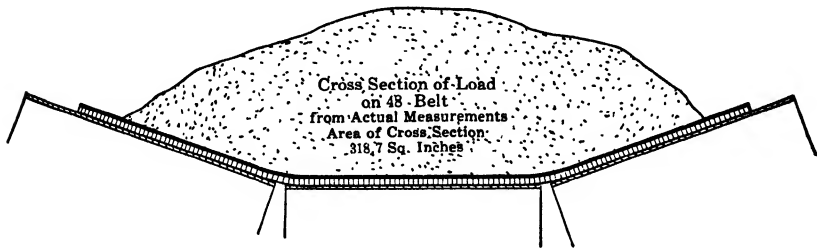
Cross Section of Load on 48-inch Belt.
